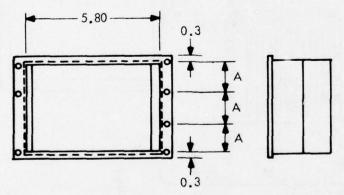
Rack with Front Removable WRAs and Wiring
